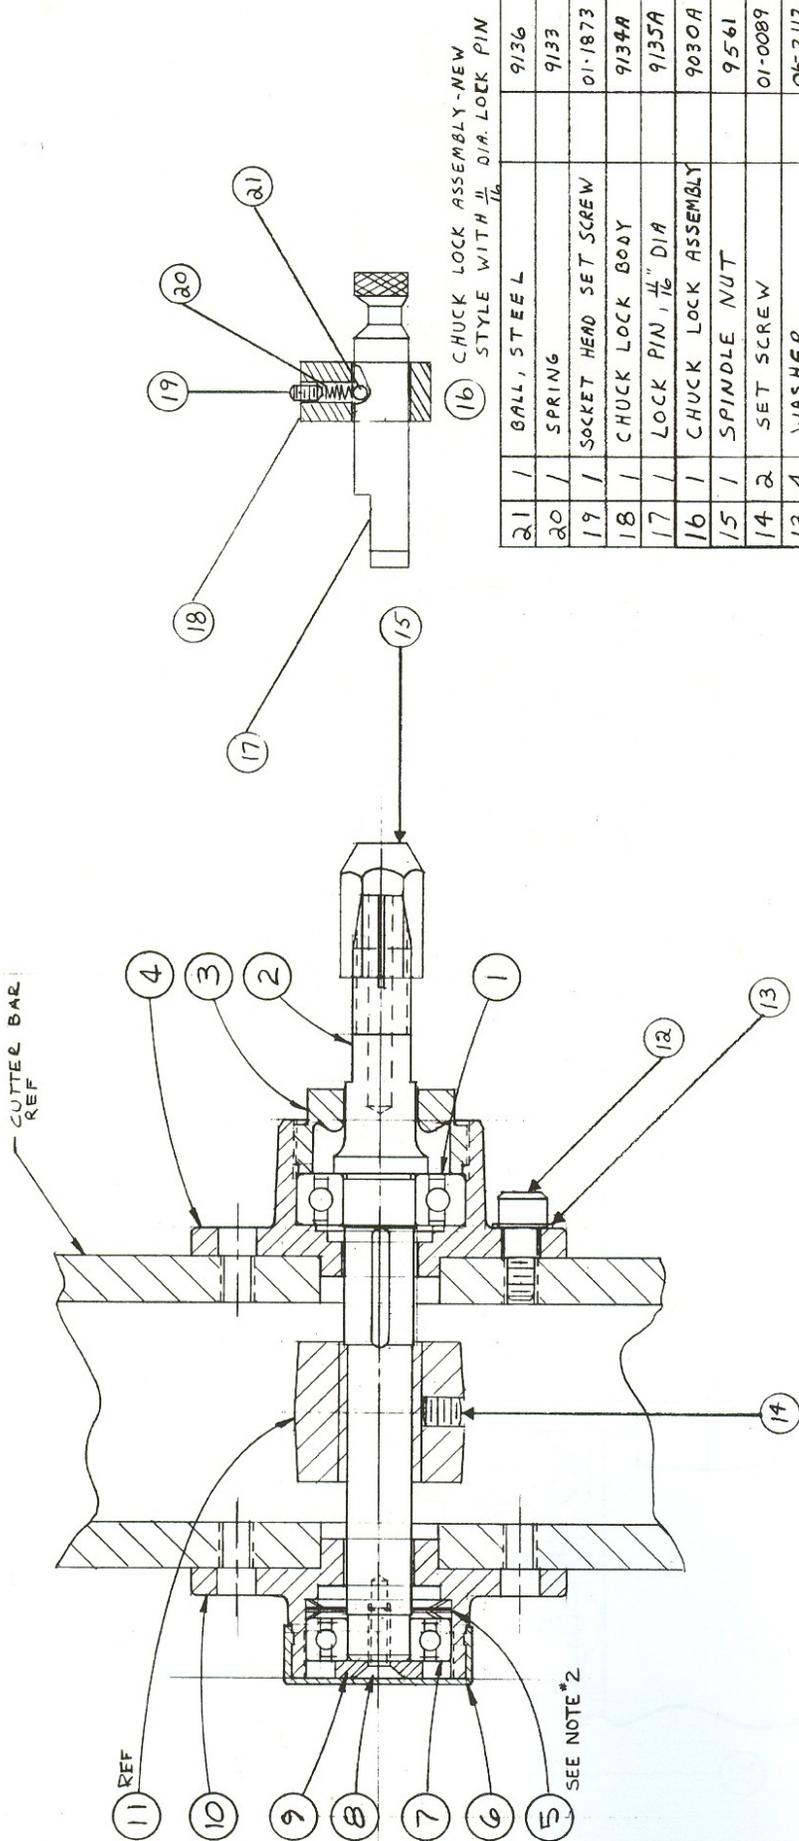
Cutter Bar Spindle Assembly (Old Non Collet Style)
